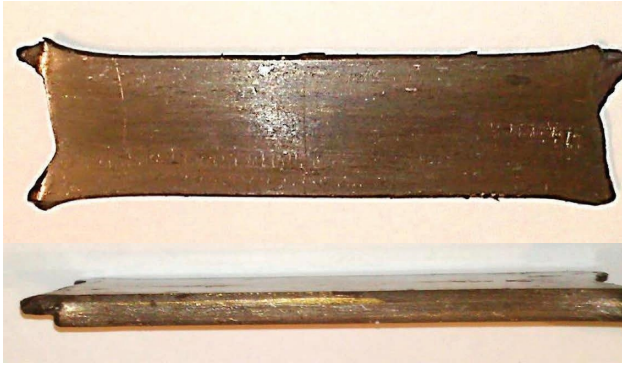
The sample shape after the TE and after the first stage of subsequent billet rolling. Sample dimensions after deformation: thickness is 9.7 mm, width is 44 mm, and length is 175 mm.
